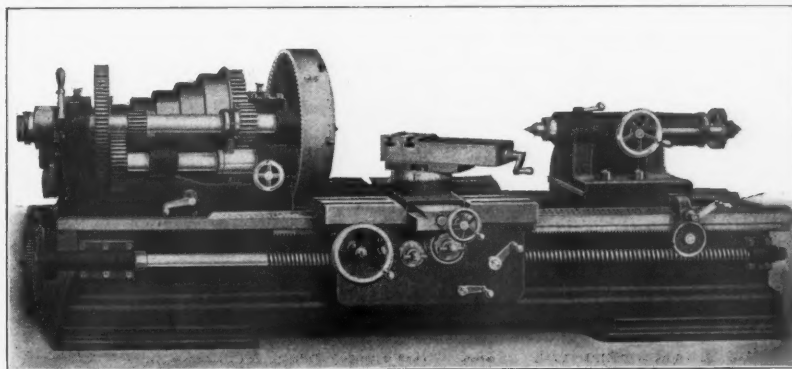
The Davis 36-in. Triple-Geared Engine Lathe.
